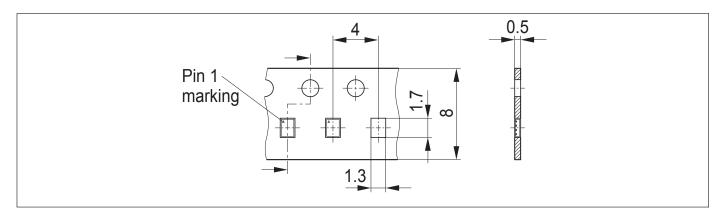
TSLP-10-3 Carrier Tape (all dimensions are in units of mm)
